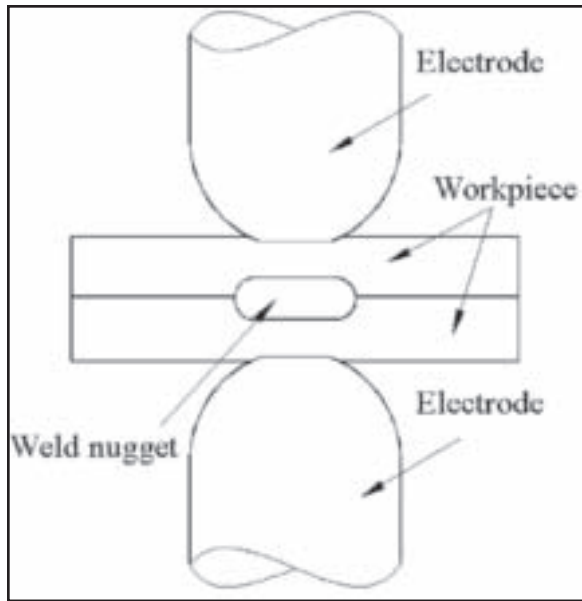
Schematic of the resistance spot welding process.
